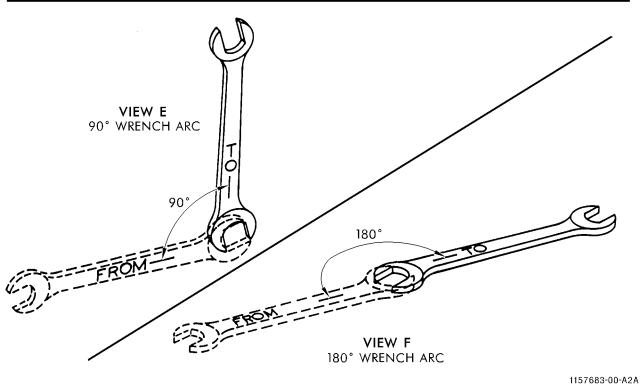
Wrench-Arc Tightening Techniques (Sheet 3 of 3)
